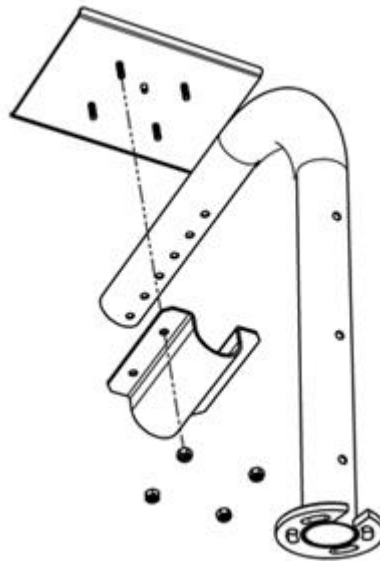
Lining up Mounting Screws with Openings in Atomlab Tube Clamp.
